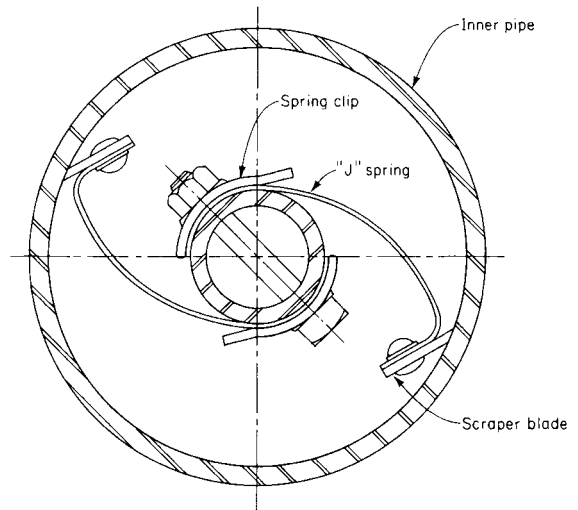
Scraper blade of scraped-surface exchanger. (Henry Vogt Machine Co., Inc.)
